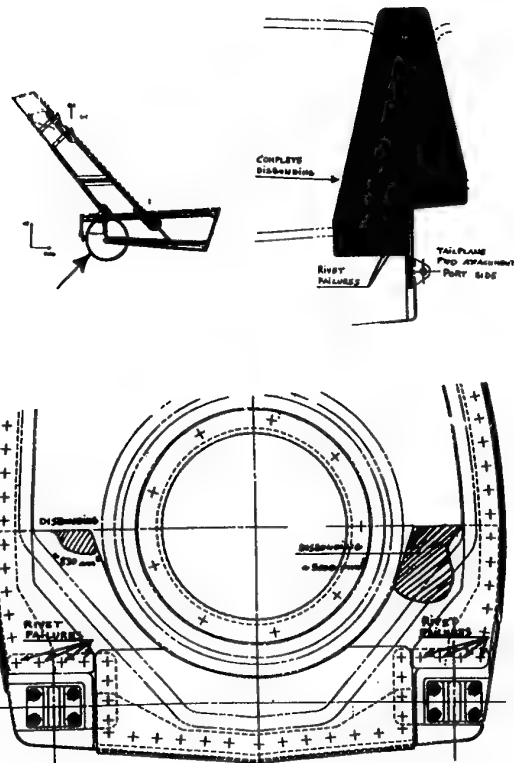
EH101 Tail Unit subcomponent for flaw tolerance test - Tailplane FWD Attachments Area
